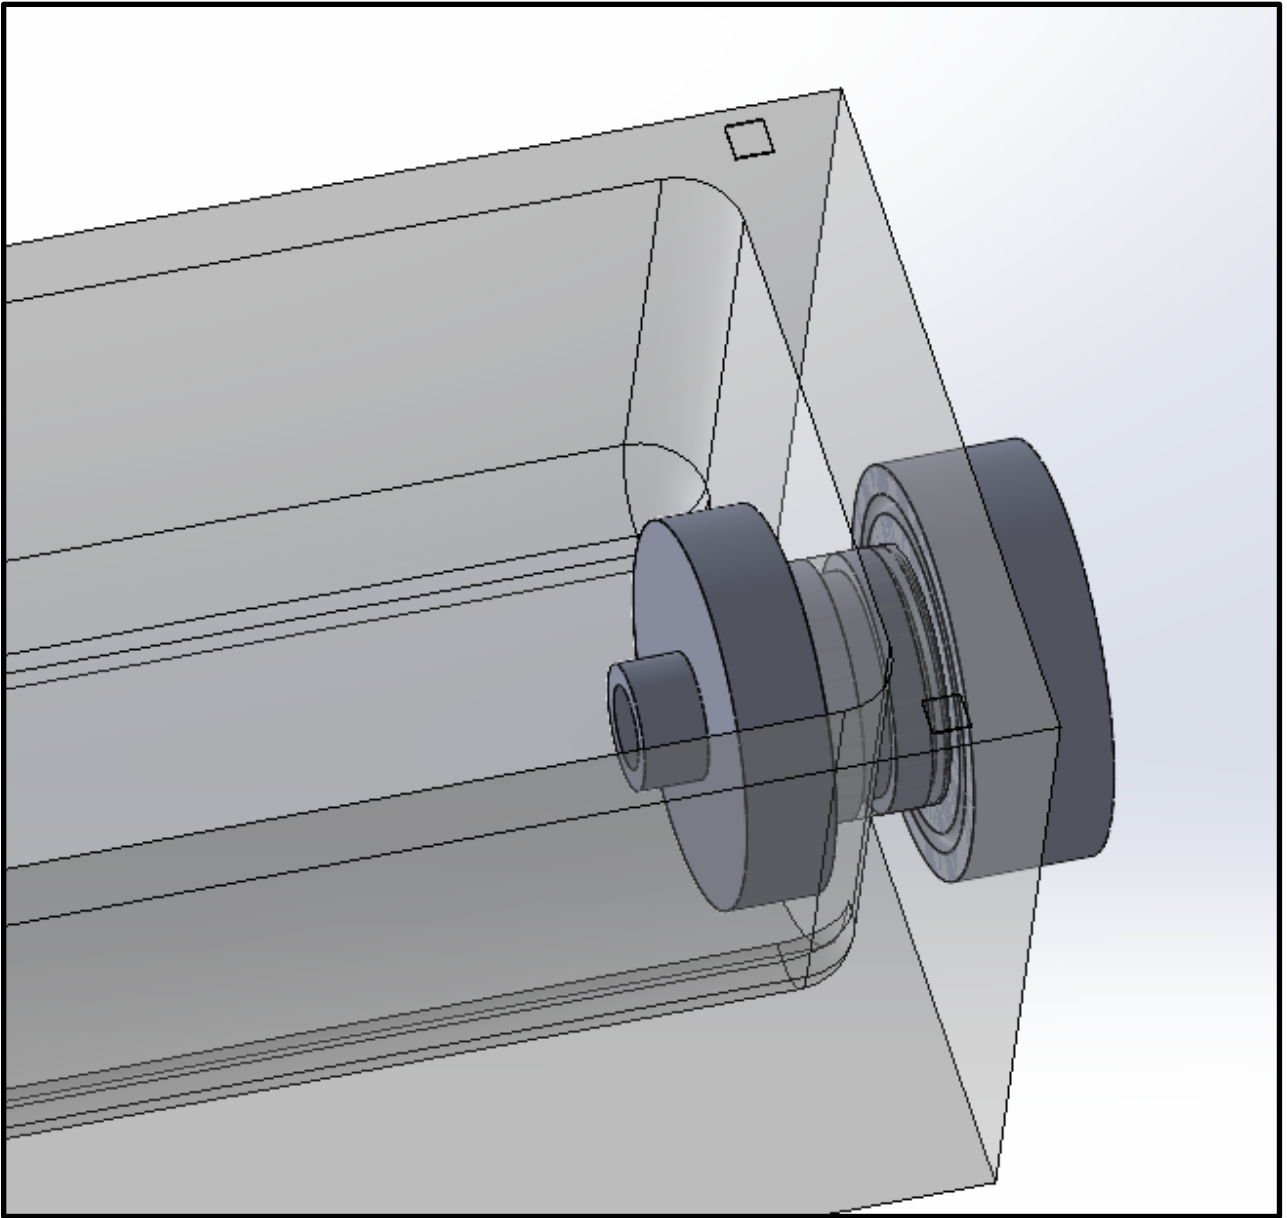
The perfusion inlet fully assembled with the chamber.
